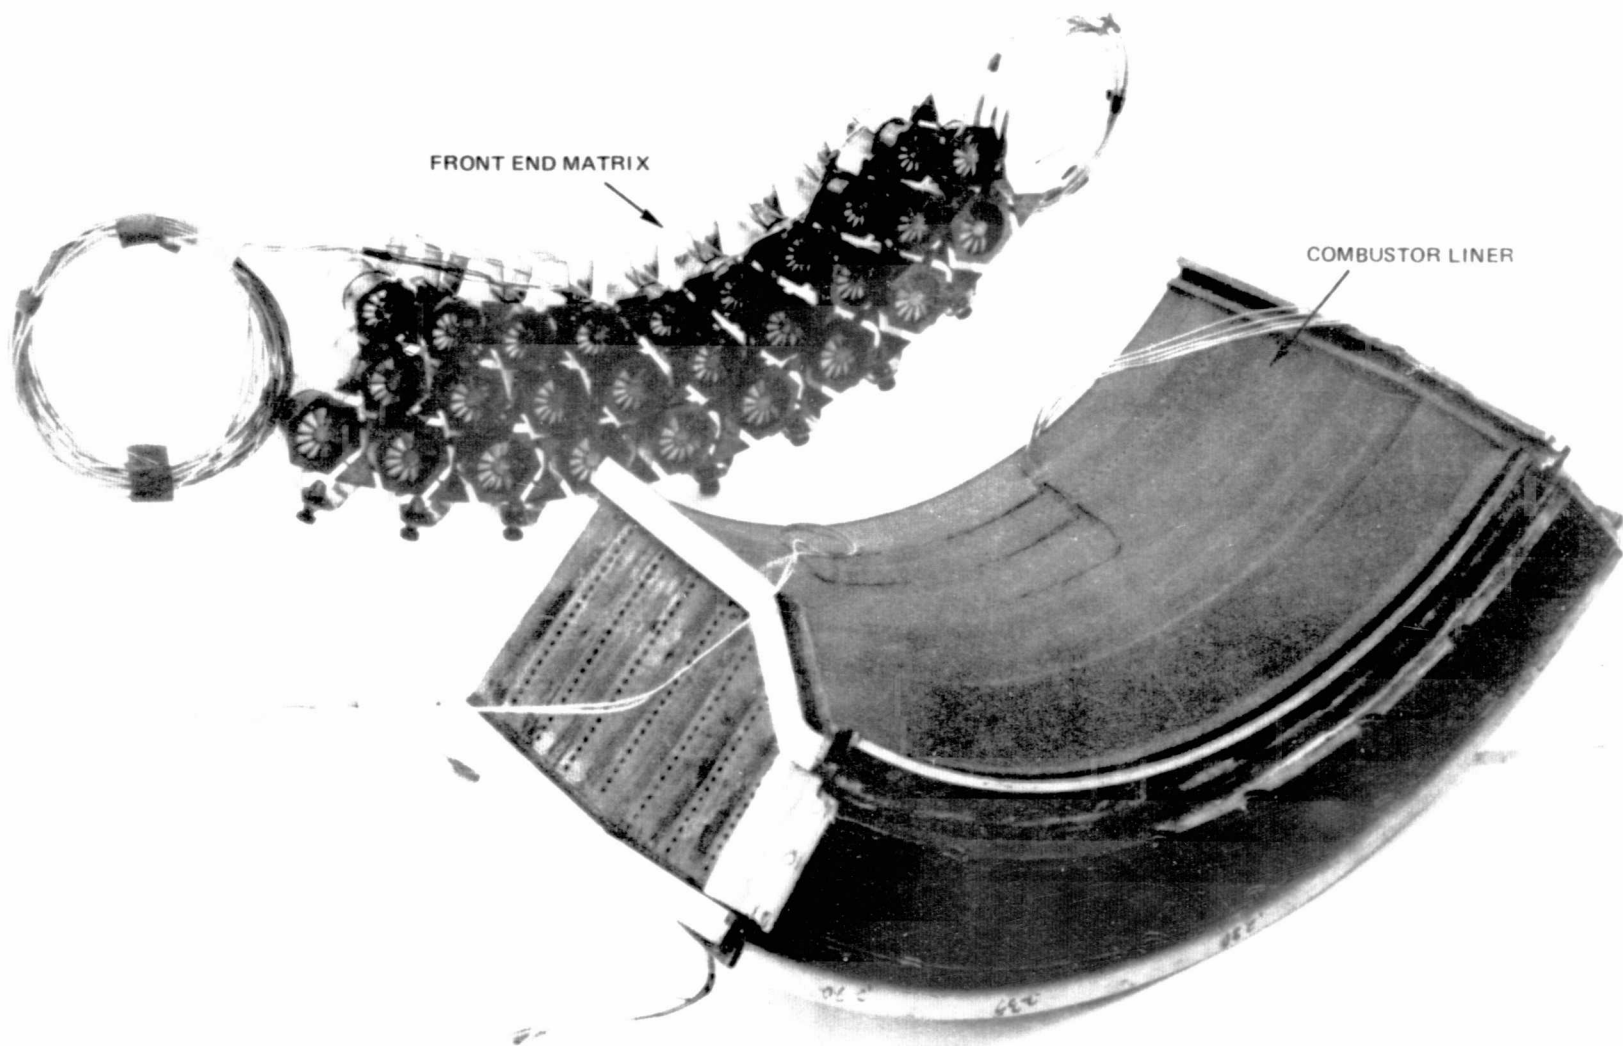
Swirl Can Combustor Liner and Carburetor Headplate Array
